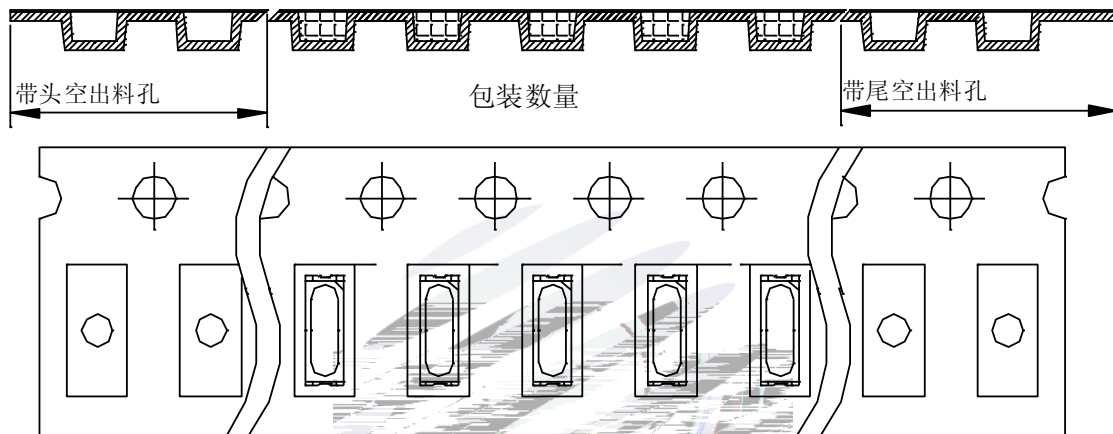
Carrier Tape Dimensions 载带尺寸
